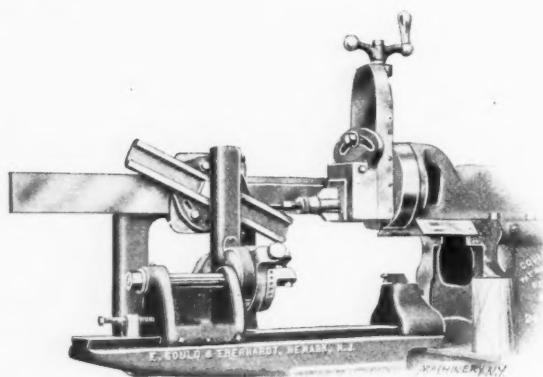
Helical Attachment for Gould & Eberhardt Shaper, in which the Lead of the Helix is obtained by the Adjustment of a Swiveling Guide Bar.
